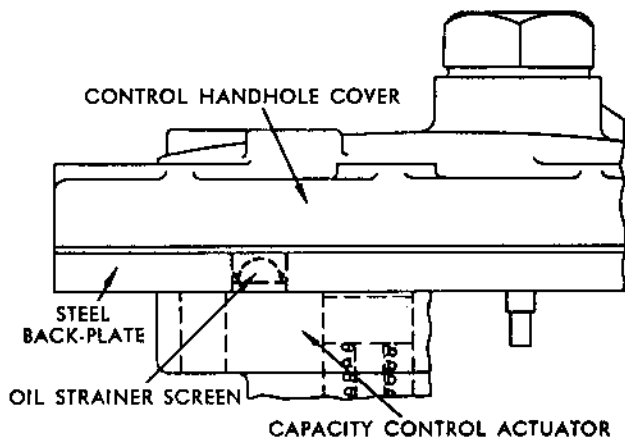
Oil Strainer Installed in Steel Back Plate.
